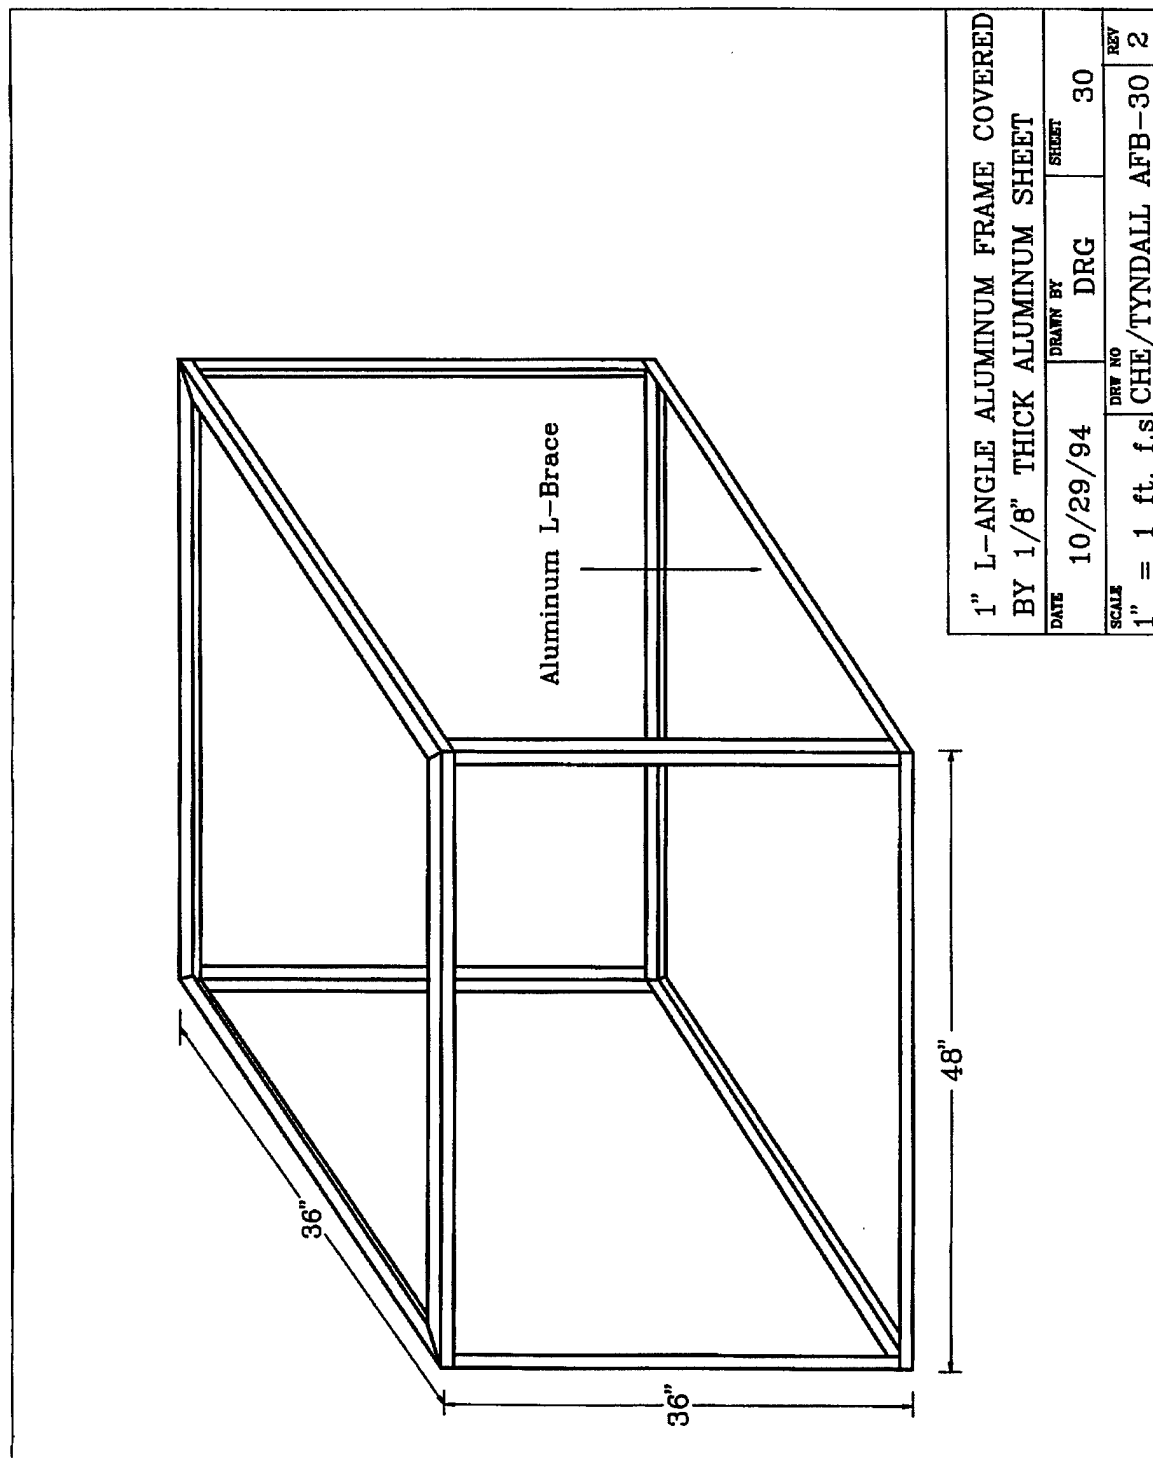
L-Angle Aluminum Frame Covered by 1/8" Thick Aluminum Sheet
